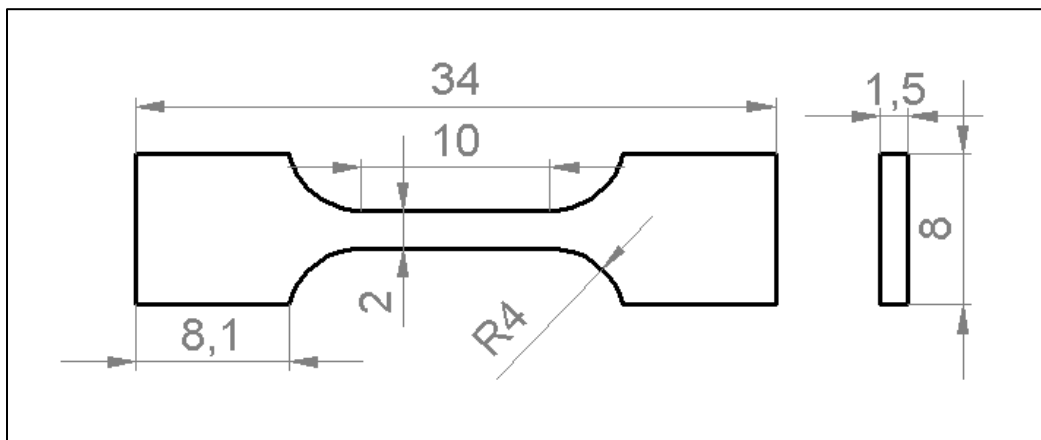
Design of the tensile specimens extracted from the block produced at TU Delft.
